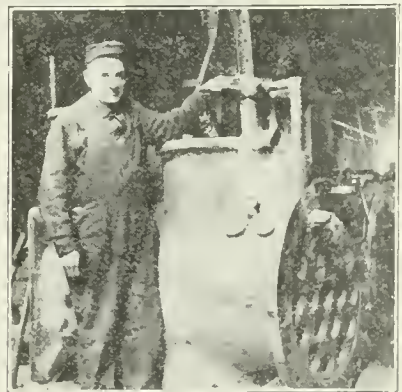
WELDED CYLINDER BEFORE REMOVING CAST WELDED METAL.
